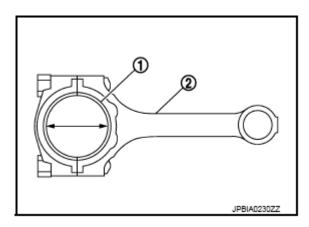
Identifying Connecting Rod Bearing And Connecting Rod Courtesy of NISSAN NORTH AMERICA, INC.
